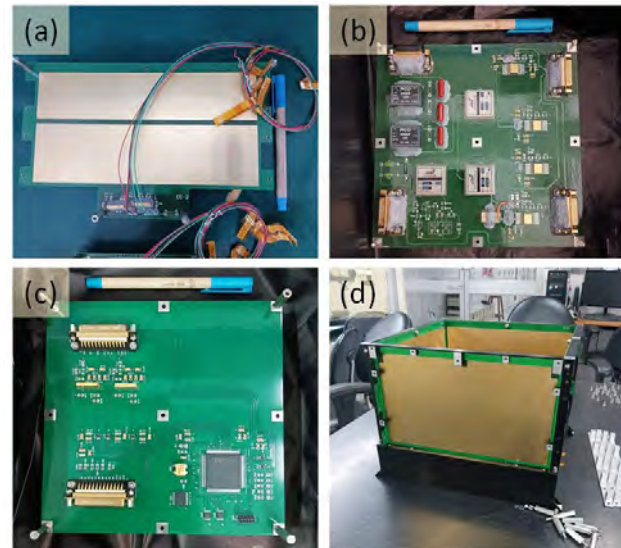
Cards of flight model with components soldered on them. (a) Housing PCB (b) Power card (c) Processing PCB and (d) Detector structure after mounting PCBs.
